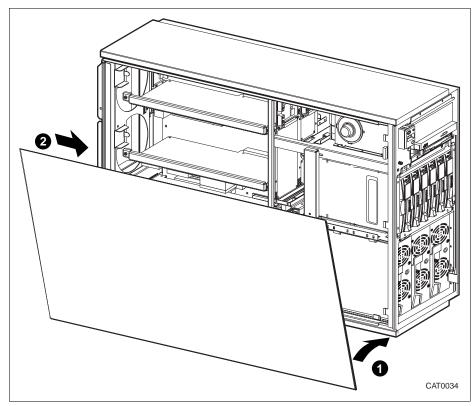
Removing and Replacing the Side Panel on a Pedestal System
